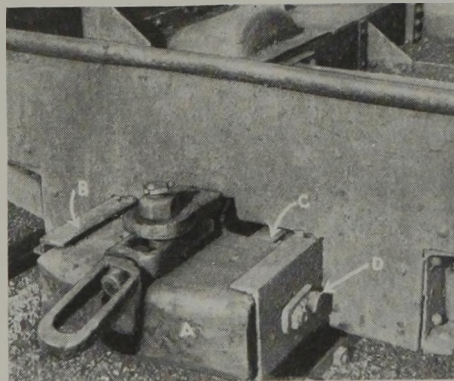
Spring Bumper Which Replaced the Rigid Type.
